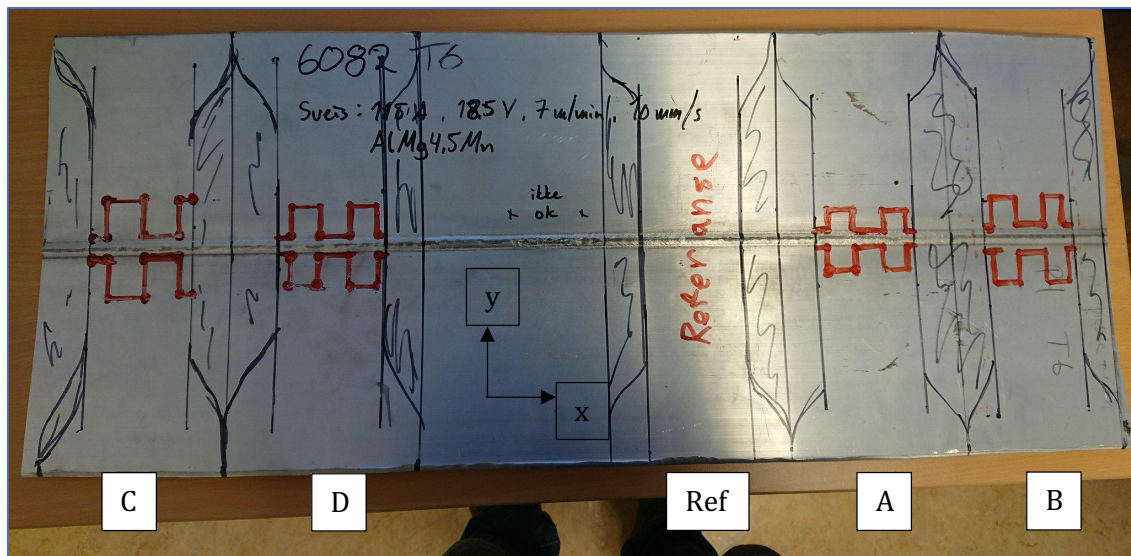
Image of the welded profile with patterns for the laser treatment and tensile test specimen geometry.
